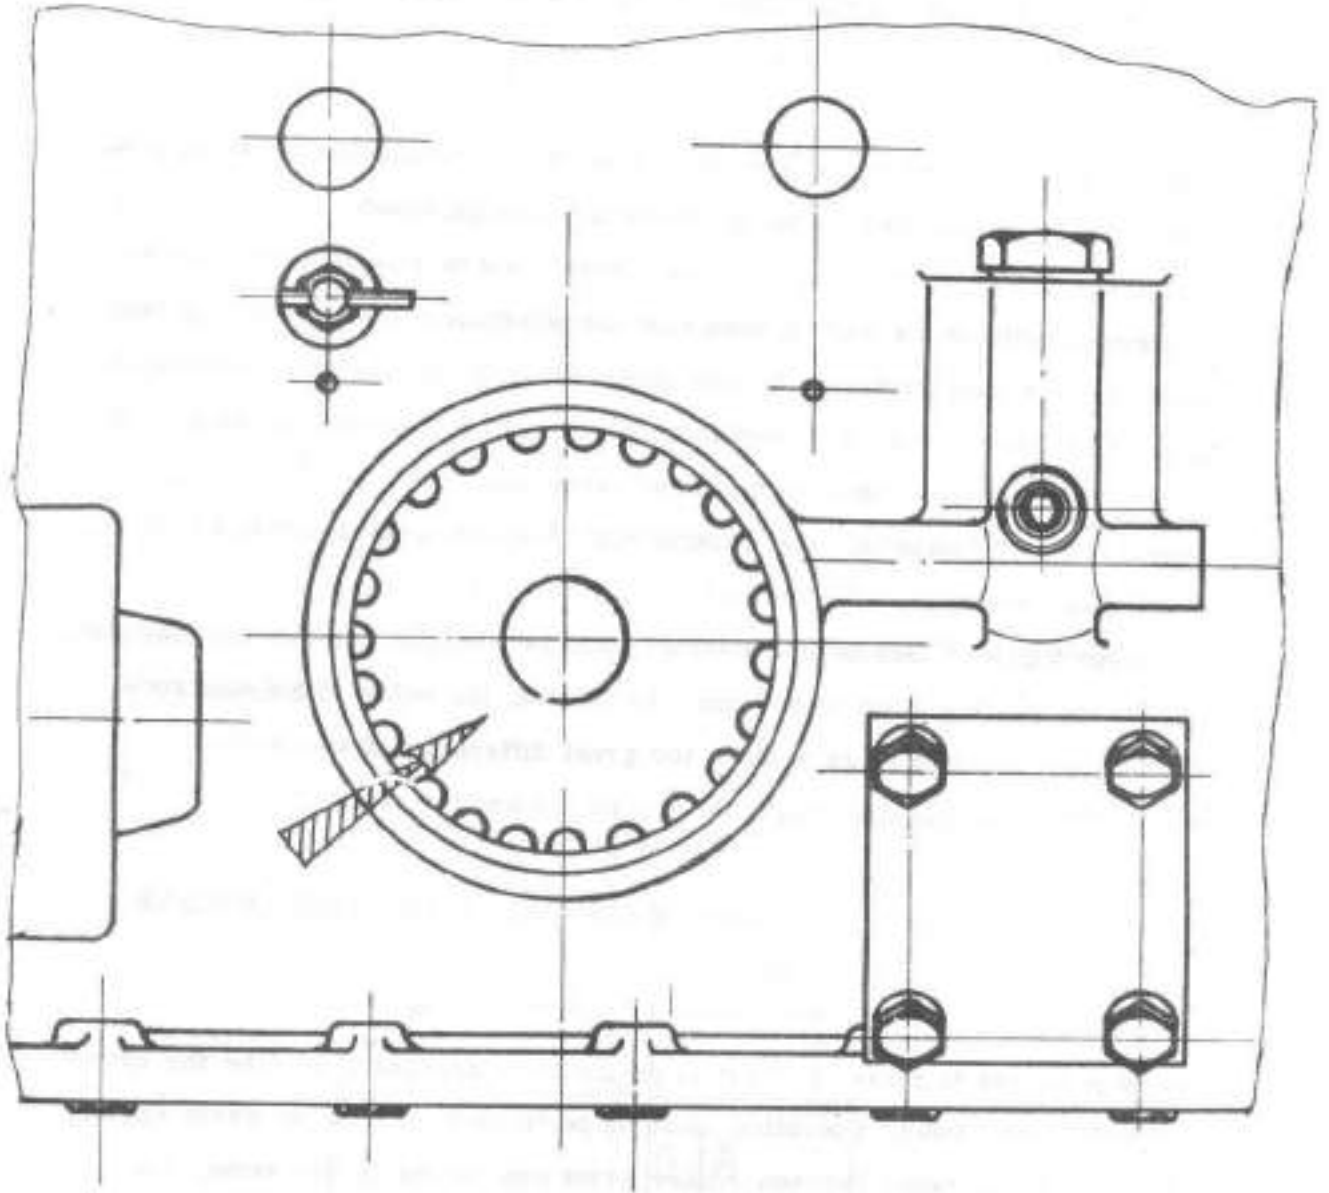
ARO L-25 ENGINE OIL FILTER
